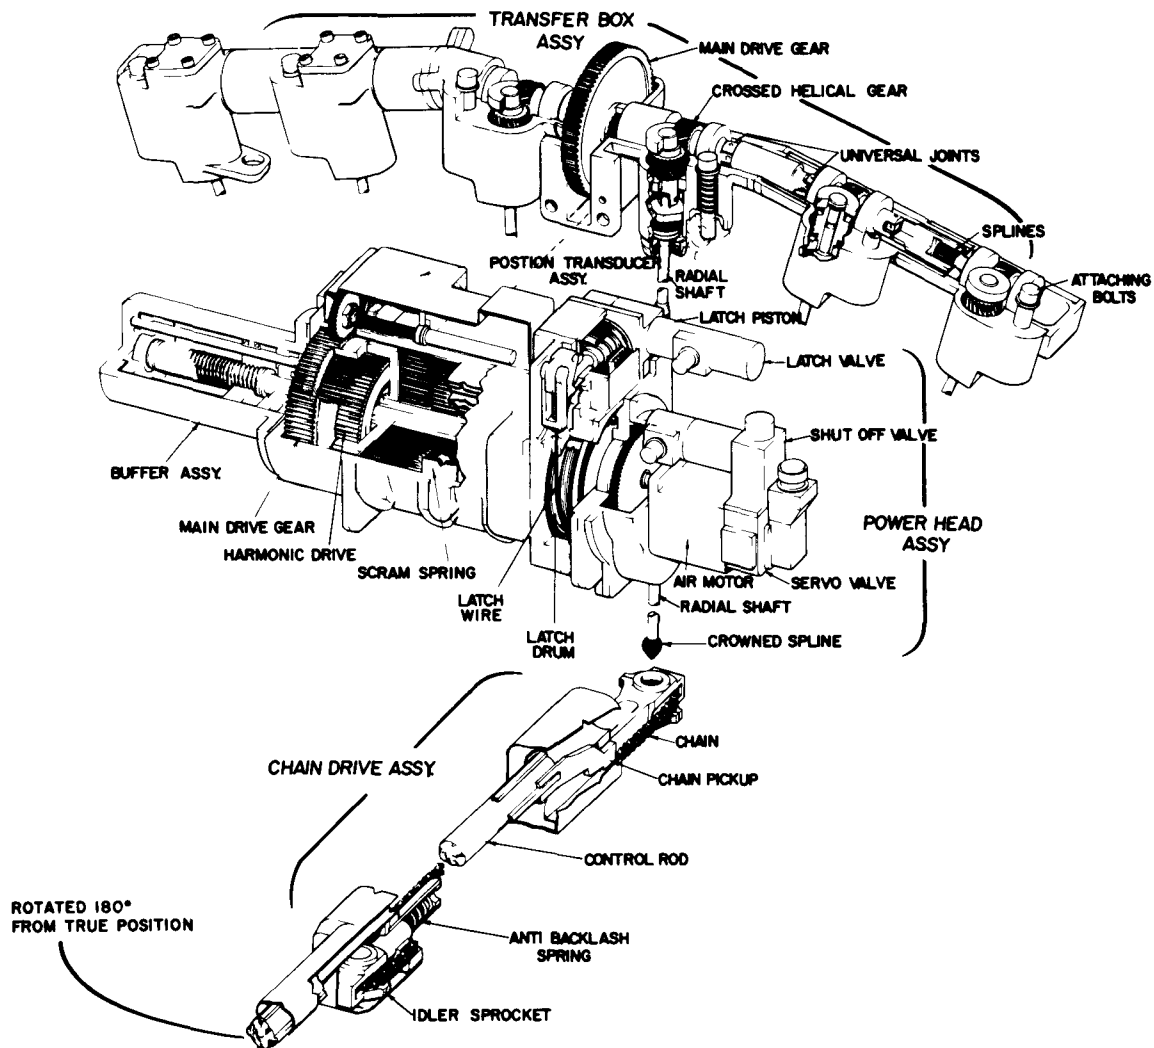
Control rod actuator assembly Dwg. D.I. 564
